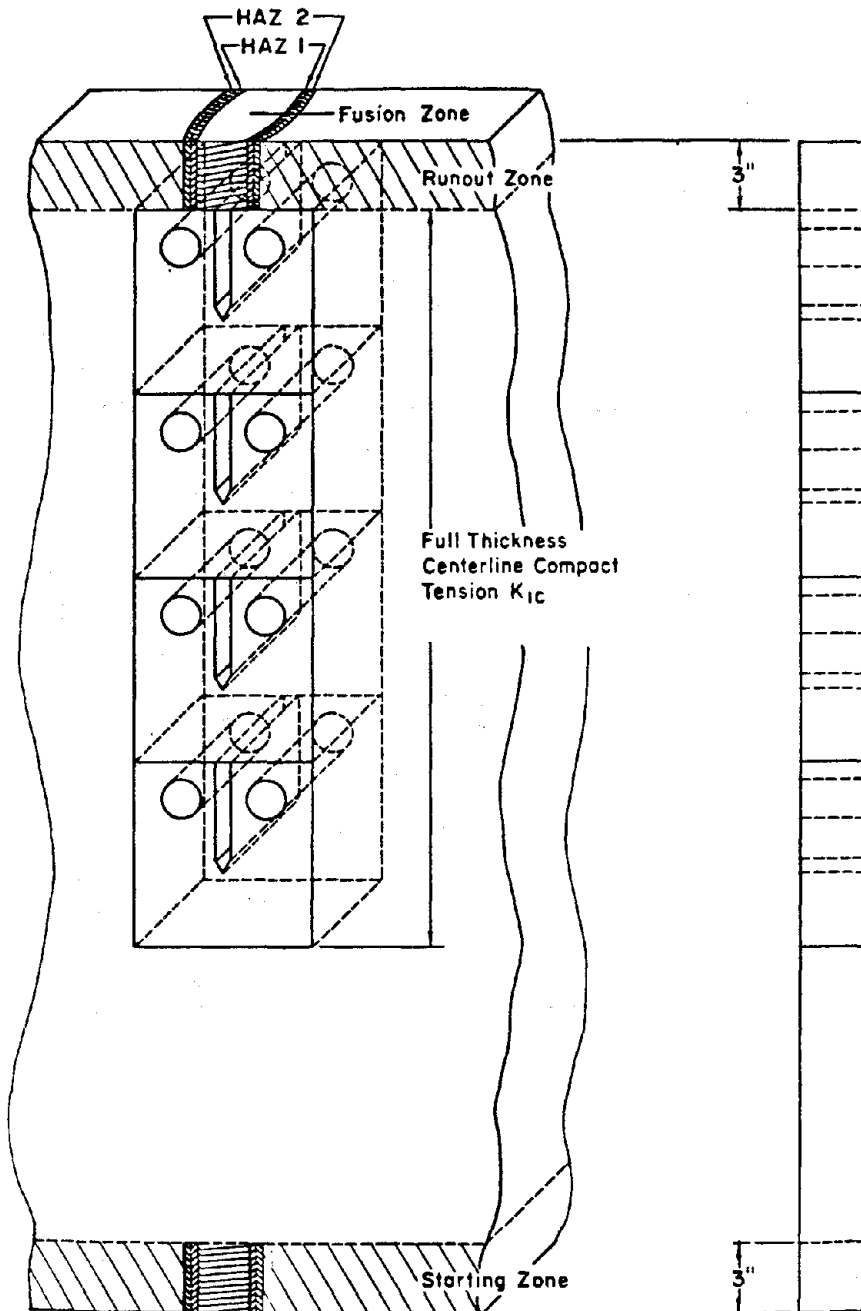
Location of K_{IC} specimens with respect to ES weld location. (Schematic.)
